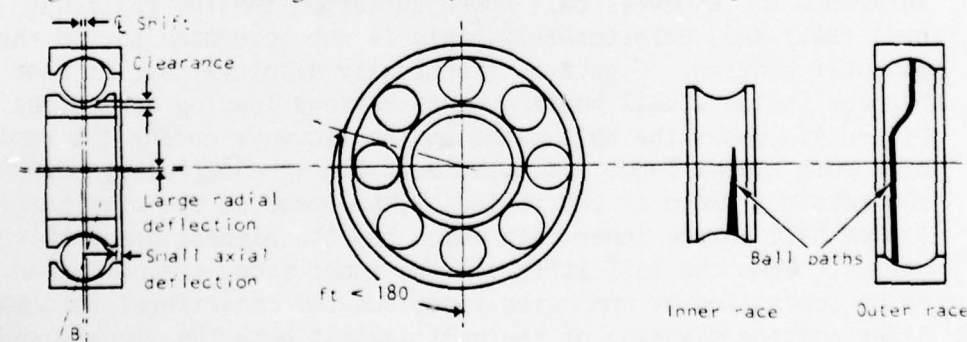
Bearing with Light Thrust Load and Heavy Radial Load
